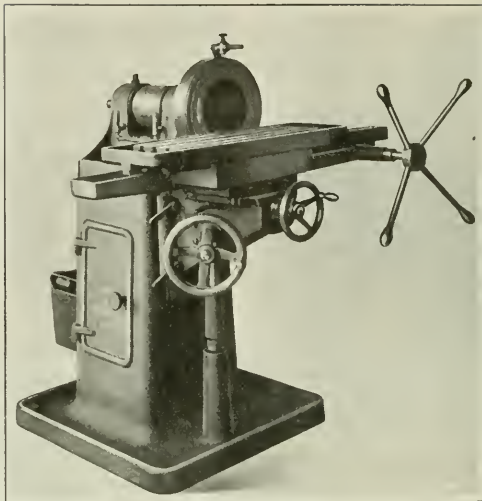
Knee-type Ring-wheel Grinding Machine brought out by the Graham Mfg. Co.
